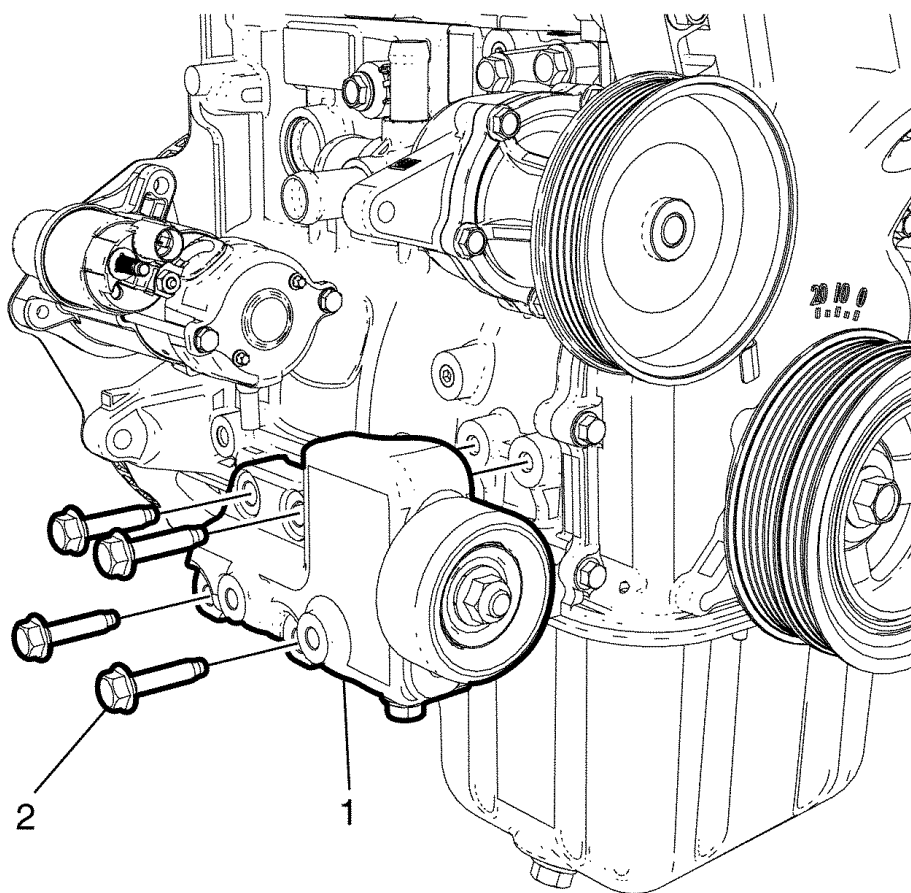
Generator Bracket Retaining Bolts And Bracket
